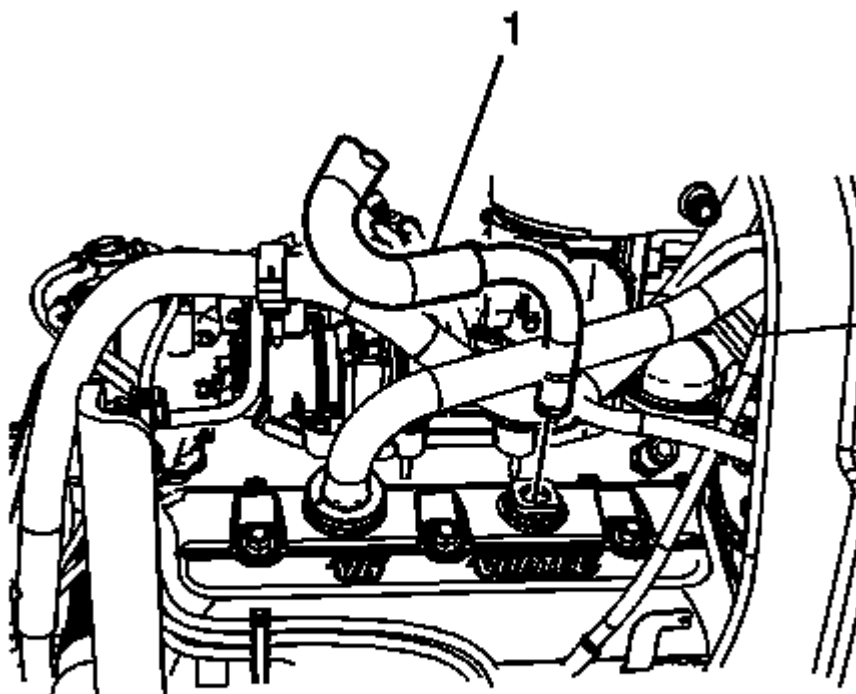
View Of Positive Crankcase Ventilation (PCV) Hose
